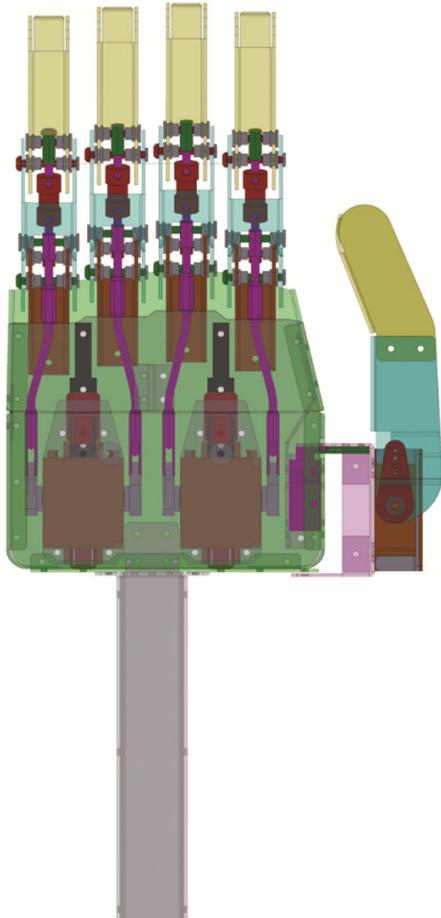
The top view of the proposed robotic hand 3D model designed in Solid Works
